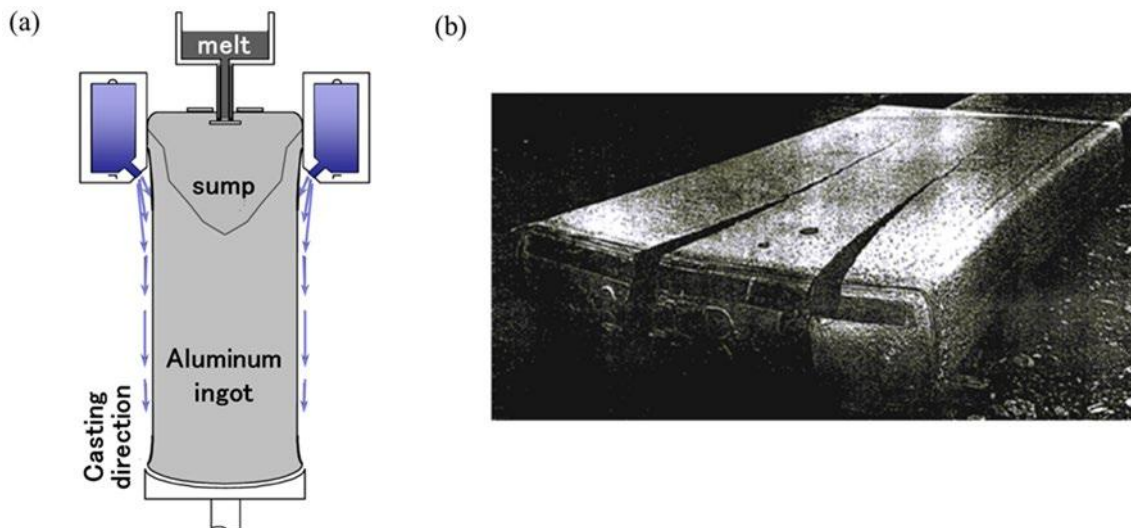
(a) Schematic diagram of direct chill casting, and (b) the occurrence of hot tearing in the slab [9].
